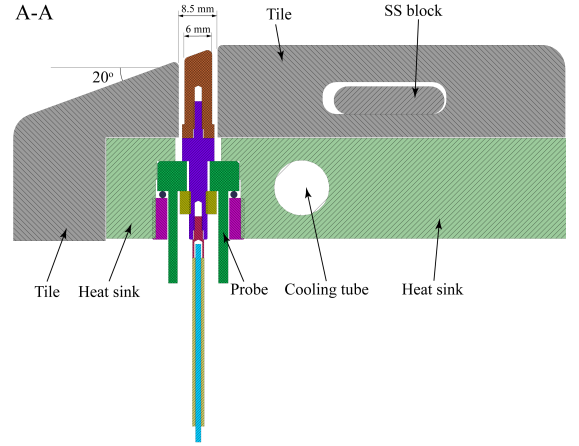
Cutaway view of A-A with cut face shown in Fig. 1 (c).
